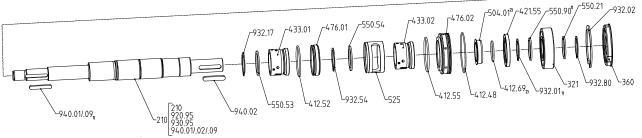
Exploded view of an Etanorm SYT, bearing brackets WS\_35\_LS / WS\_55\_LS with double mechanical seal <sup>1)</sup> For WS\_55 only
